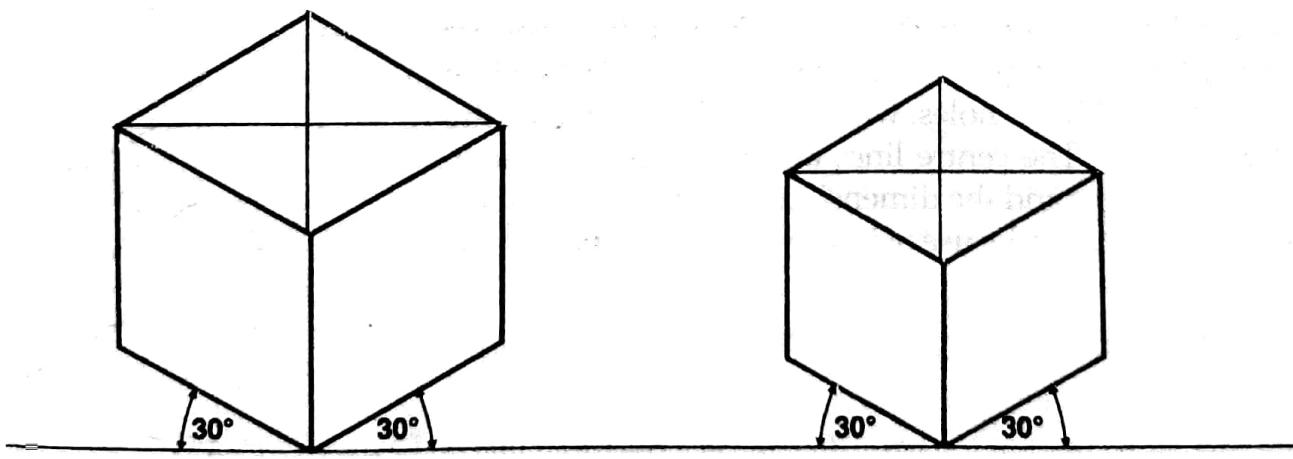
Isometric drawing is 22.5% larger than isometric projection
